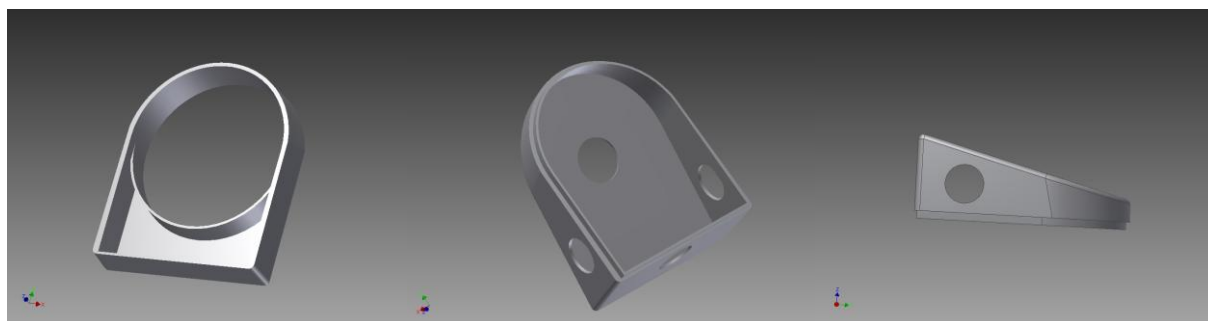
Autodesk Inventor Professional images of the fourth prototype. The left picture is a top down view of the bottom piece. The middle picture is a bottom up view of the top piece. The right picture is a side view of the bottom piece.
